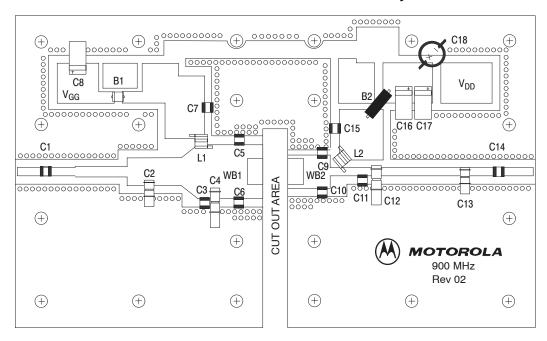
930-960 MHz Broadband Test Circuit Component Layout (MRF9030MR1)
